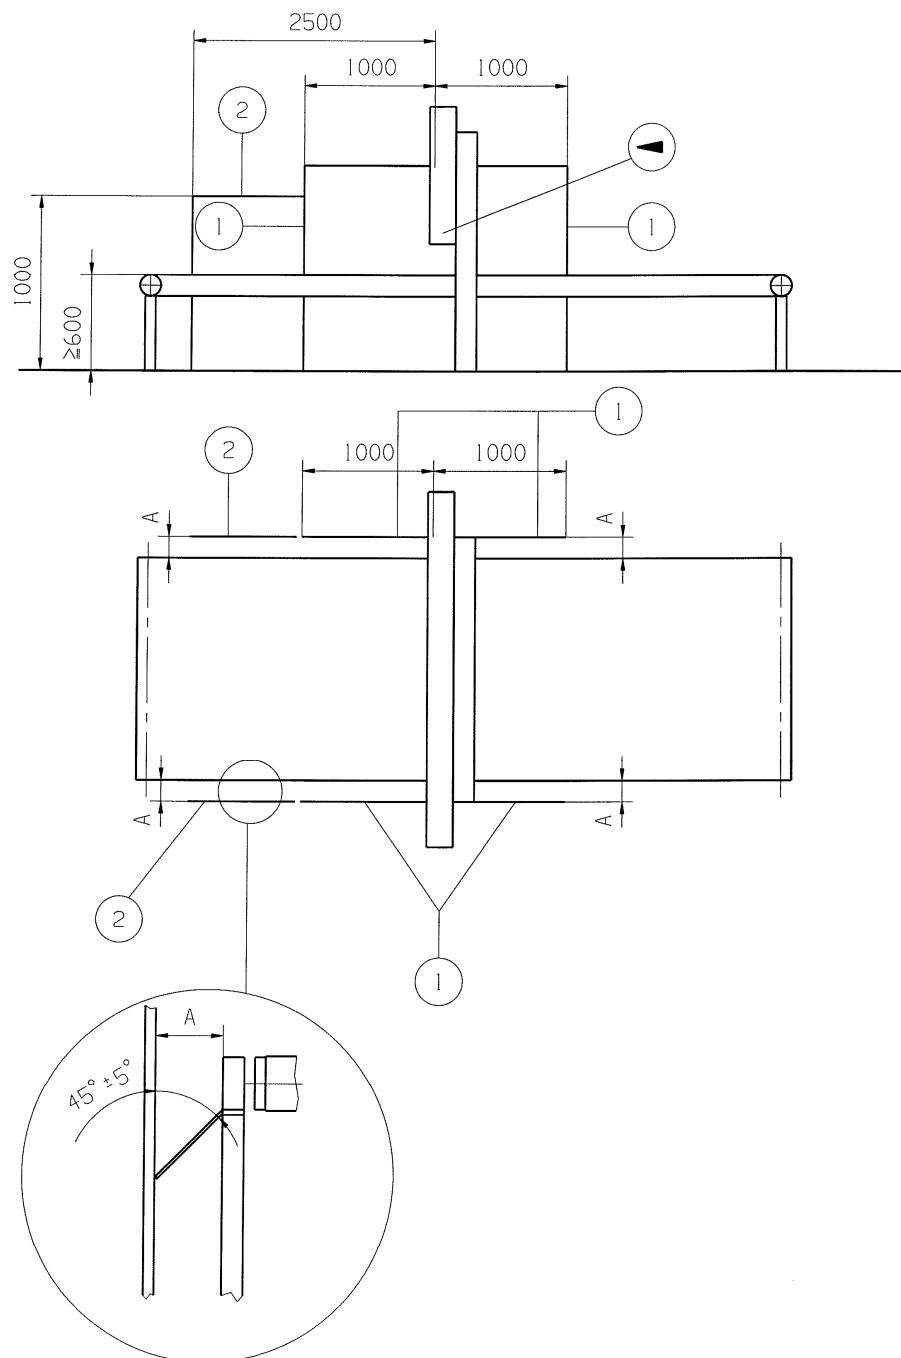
Horizontal bandknife cutting machine with shuttle table (without conveyor belts)
